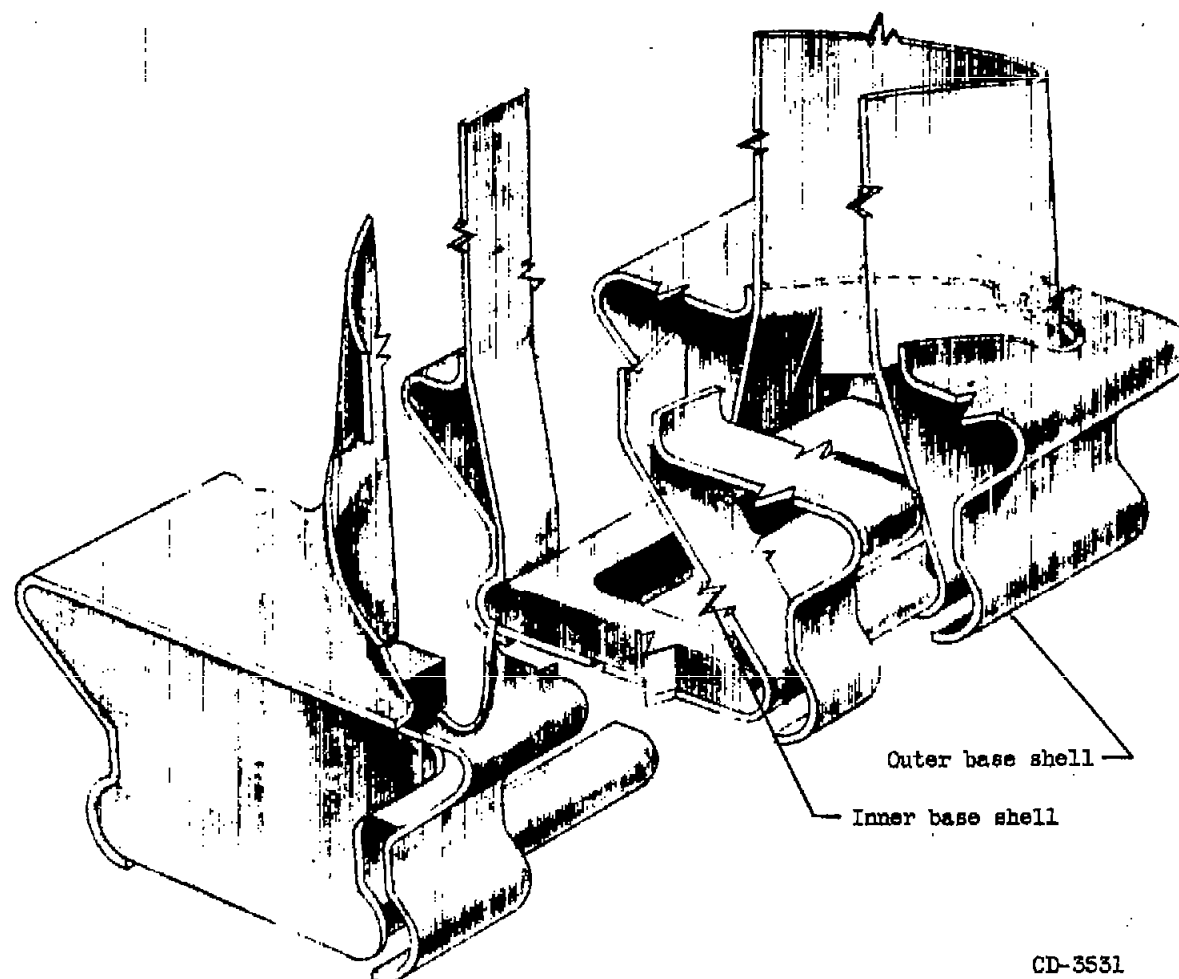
Sheet-metal bulb-root-type air-cooled base.
